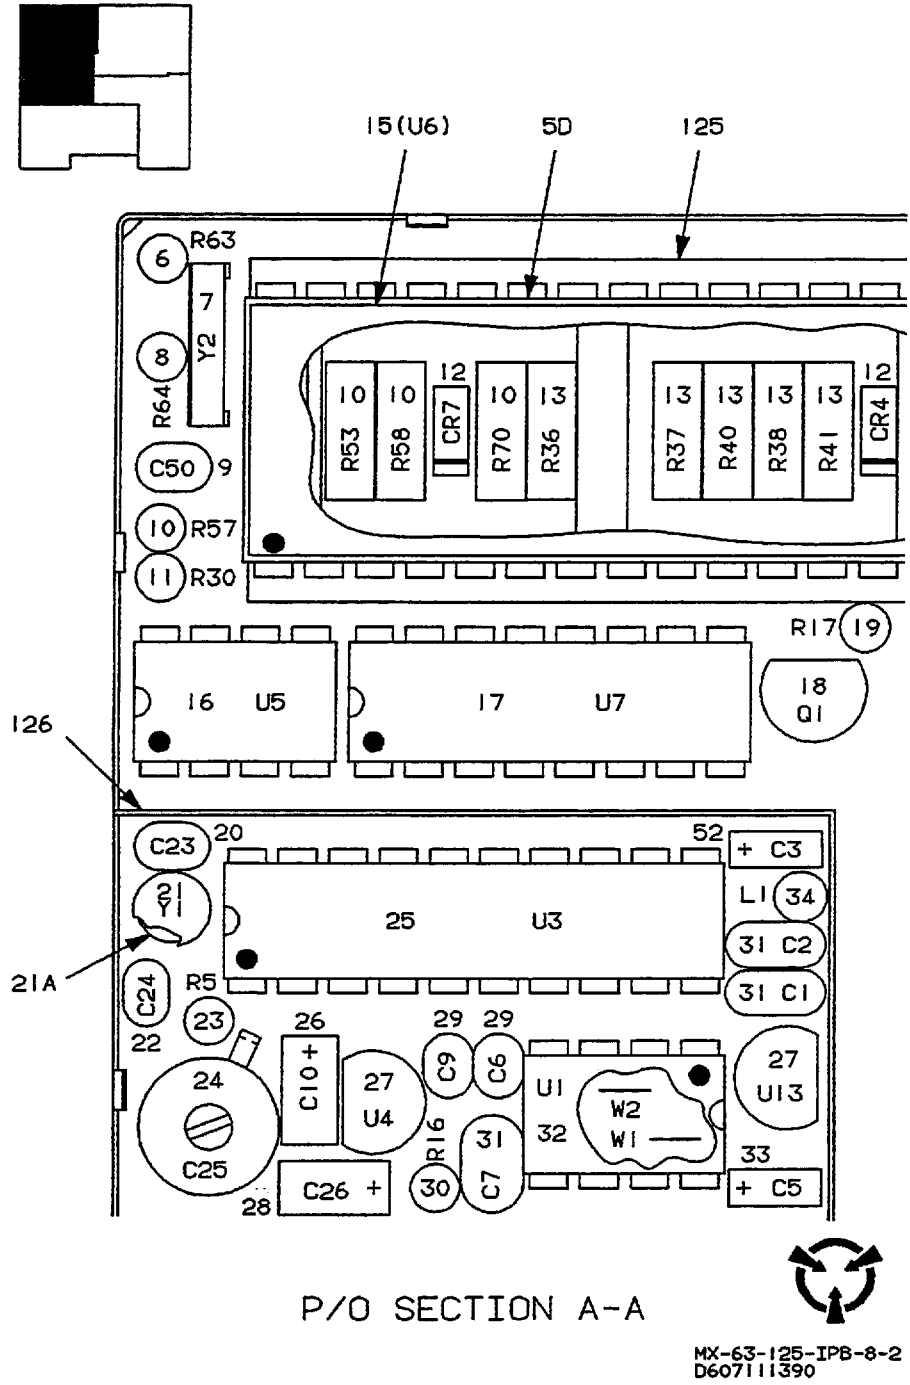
Synthesizer/AF Module Assembly (Sheet 2 of 5)
